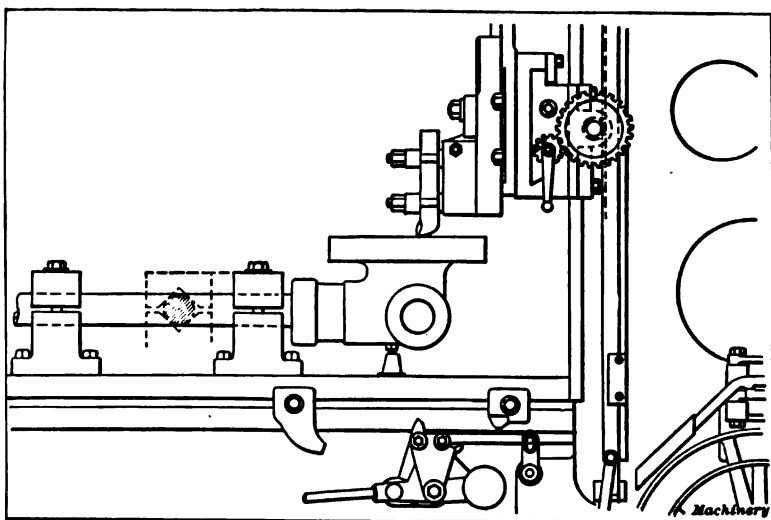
Piston-rod and Attached Cross-head Mounted in V-blocks for Planing
